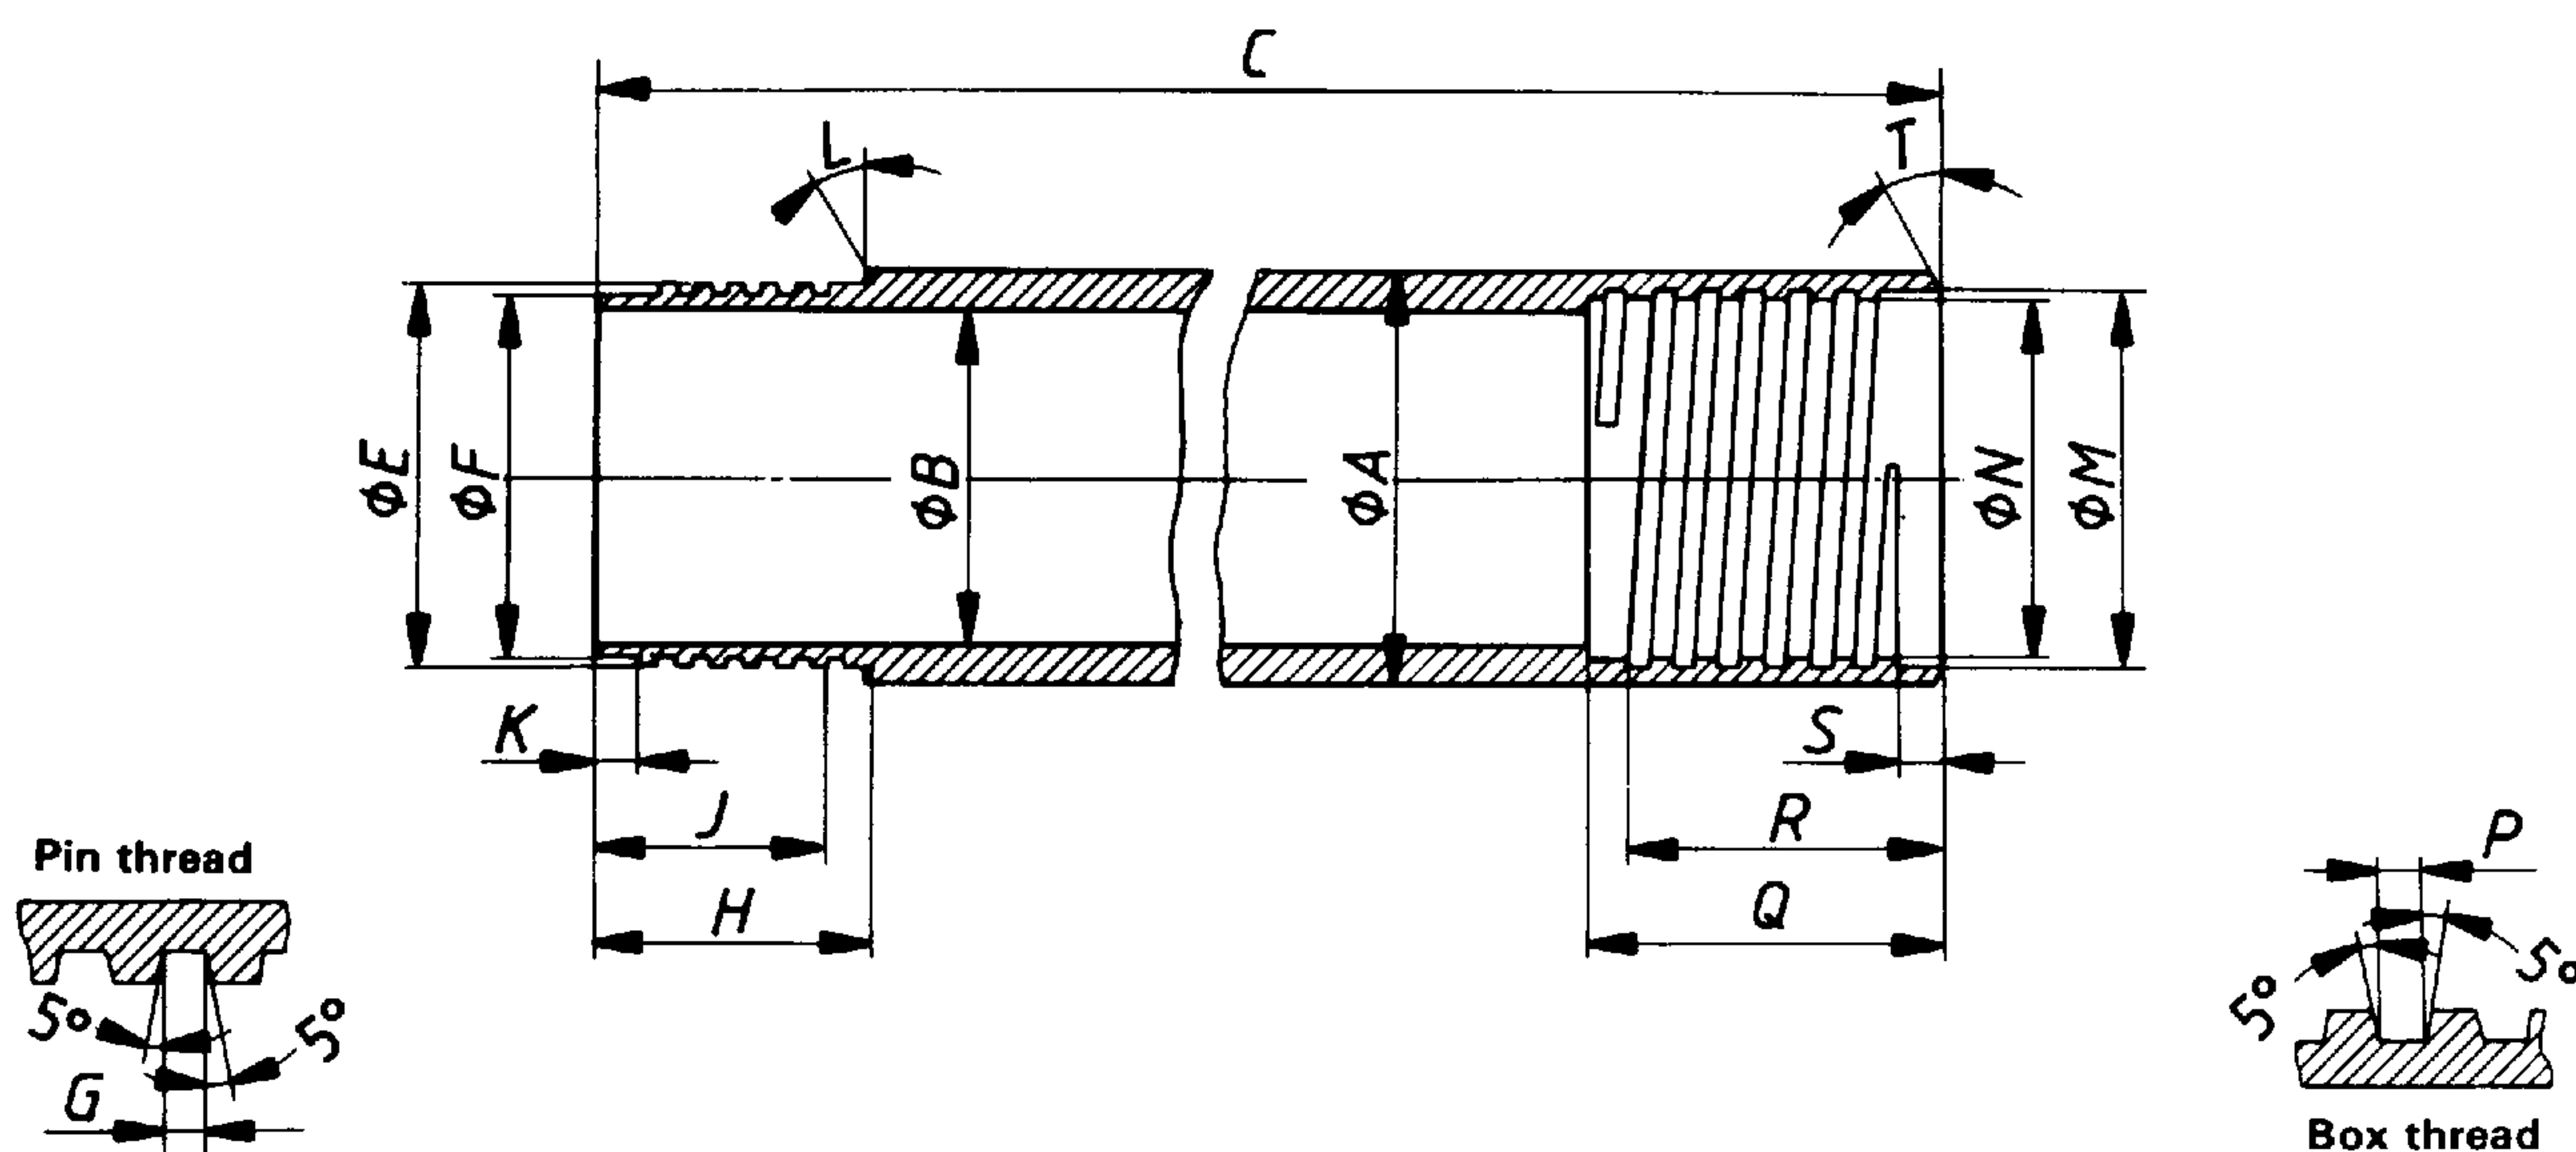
"WG" design double-tube core barrel — Outer tube (see table 33)
